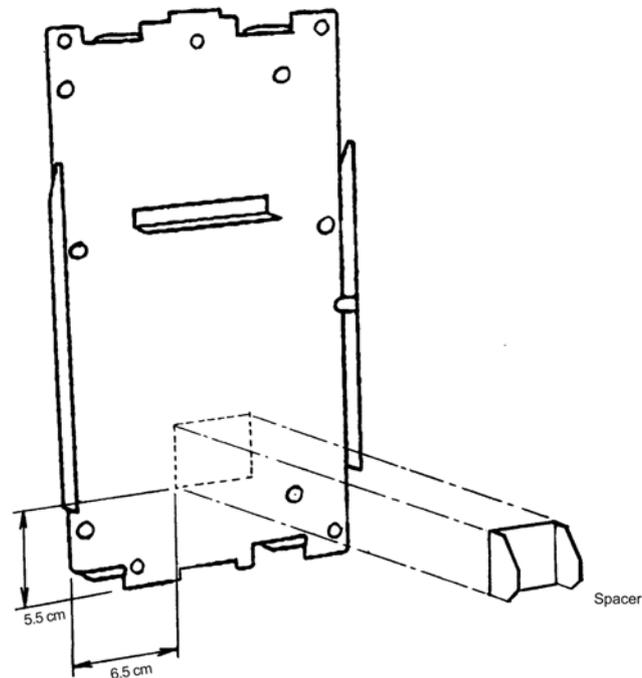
Attaching the Wall Mount Bracket Spacer
